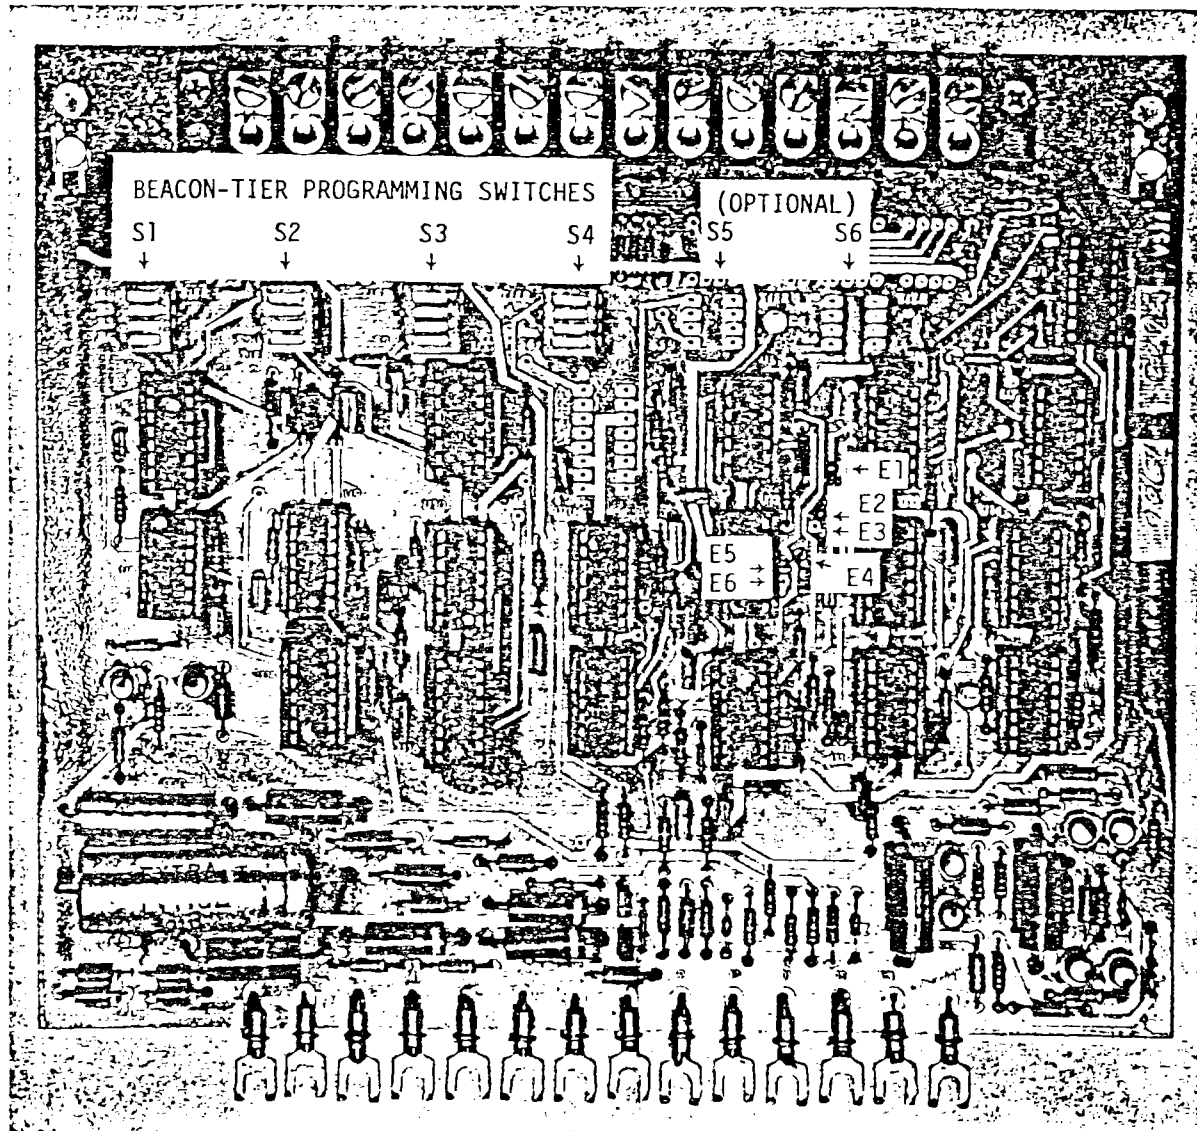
Component-Side View of Controller Board (P/N 2600)
